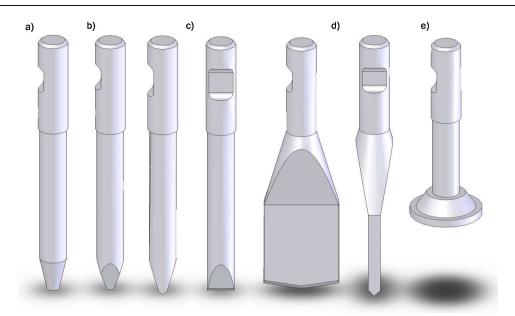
Typical set of replaceable tools of the hydraulic hammers: (a) cone, (b) moil point (pyramid), (c) chisel, (d) spade (wide chisel), and (e) tamping plate.
